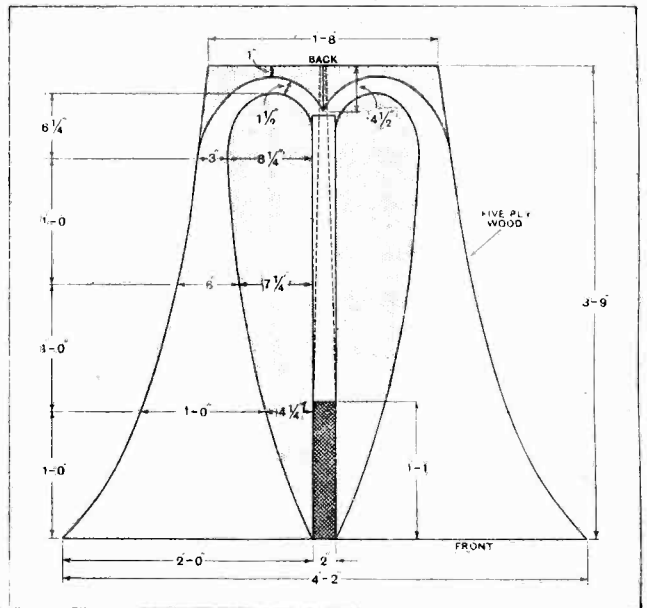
Plan of layout of baseboard and central section of 12 foot exponential horn having cut-off frequency of 64 cycles. The mouth is 4 feet square.
